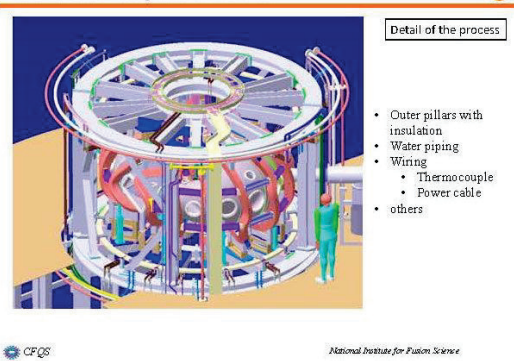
Detail of assembly flow on site (2/2).
